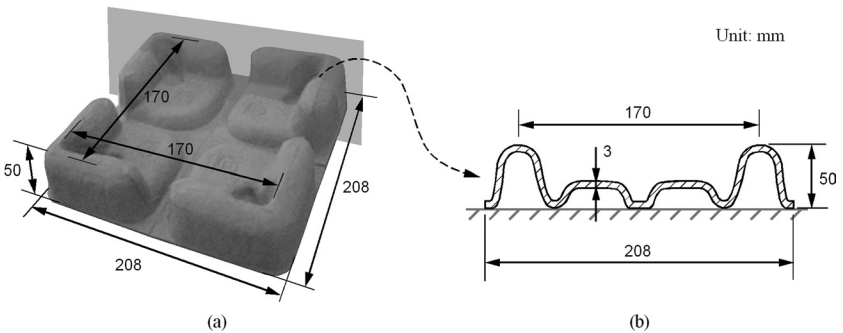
Test material. (a) Three dimensional structure of pulp mould; (b) Cross-section view of pulp mould.
